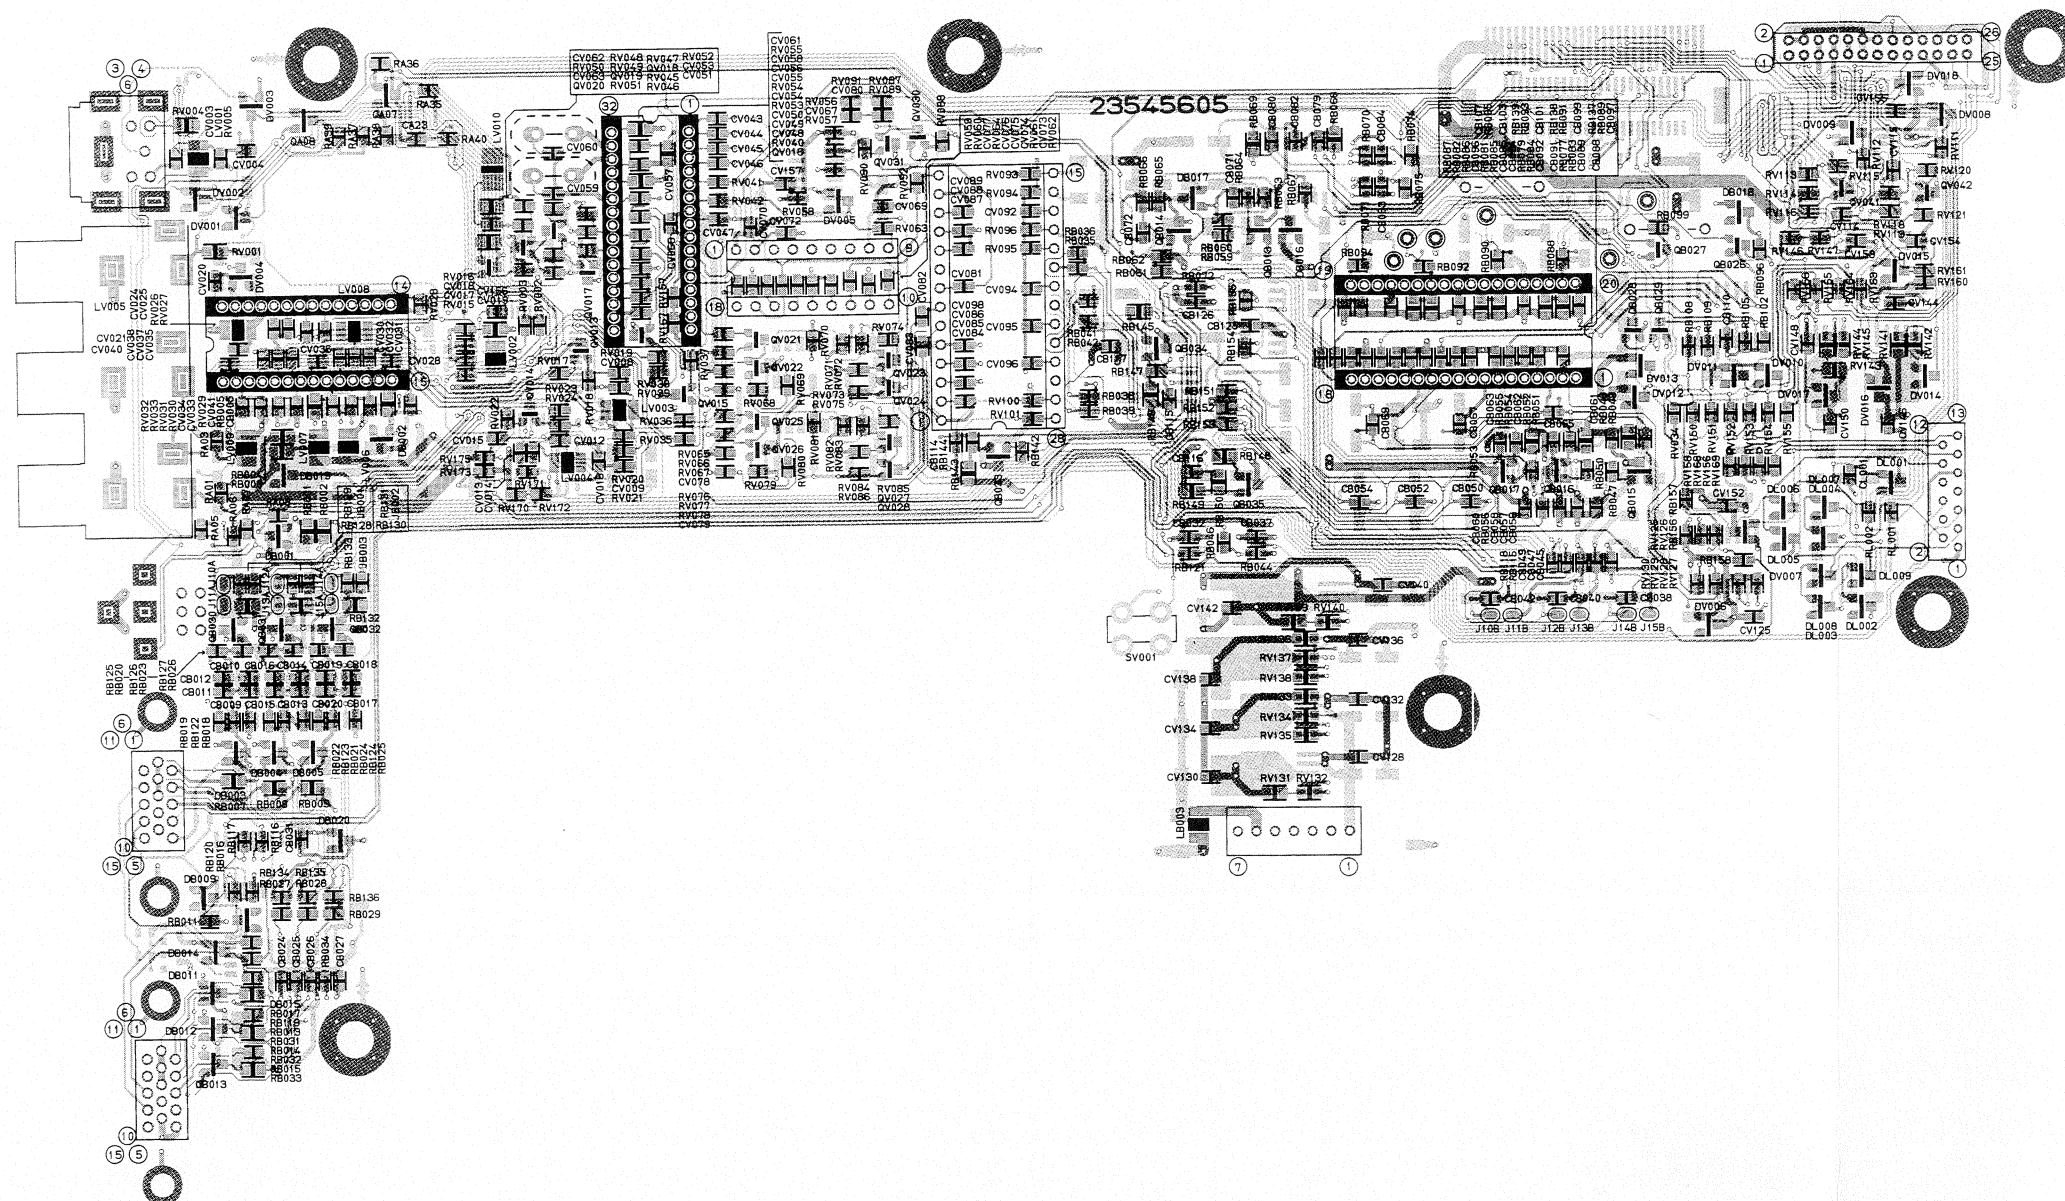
U0031 Video PC Board (Bottom Side)
